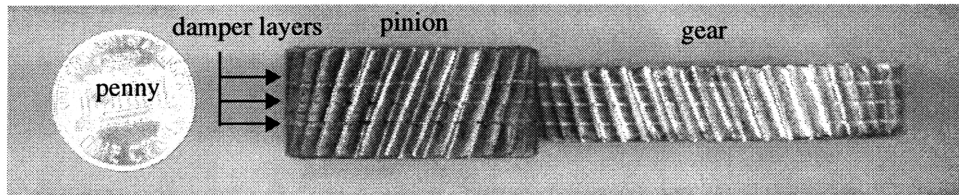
Picture of Bimetallic Composite Helical Gear Teeth
